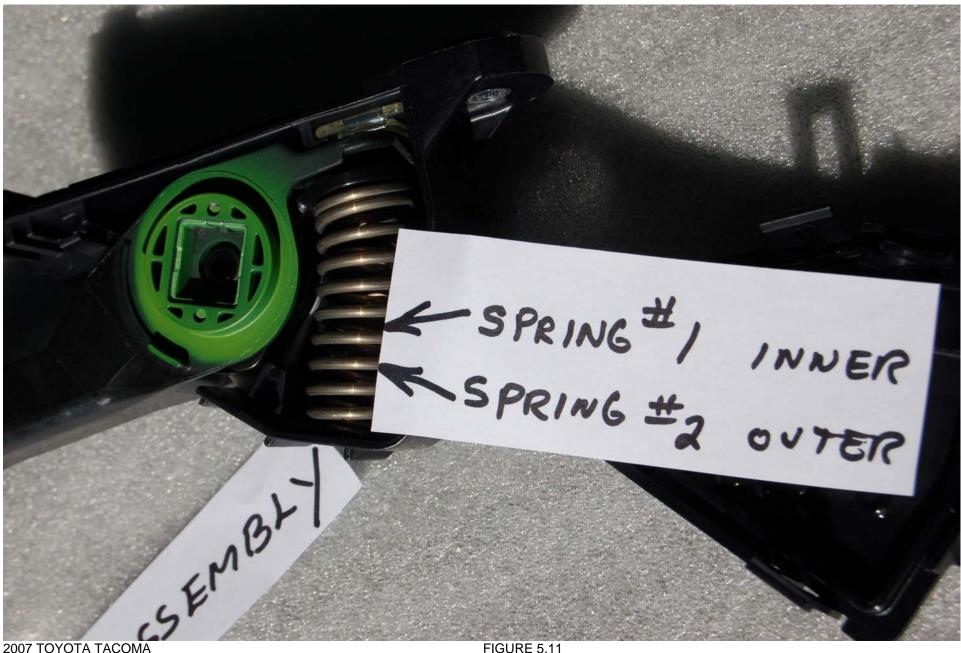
ACCELERATOR PEDAL SENSOR CLOSE-UP VIEW
